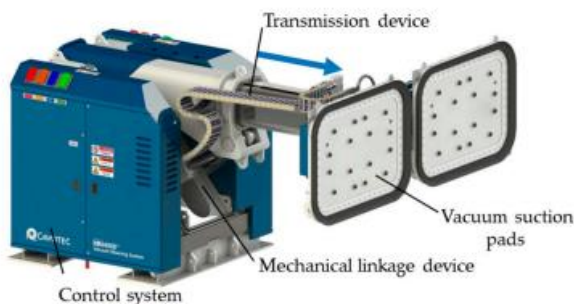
Illustrates the vacuum-based lineless mooring system's components, consisting of one transmission device and two pads.
